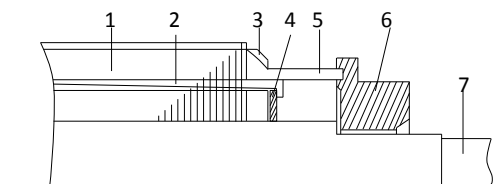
The rotor structure of asynchronous motor. 1. rotor core; 2. Wedge; 3. fix plate; 4. Ring; 5. rotor bar; 6. end plate; 7. shaft
